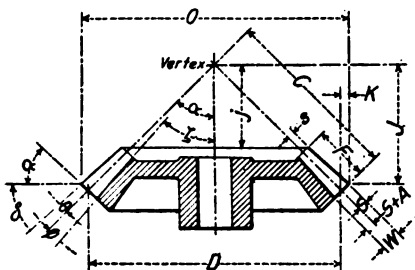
Dimensions, Definitions and Reference Letters for Ordinary Bevel Gear
